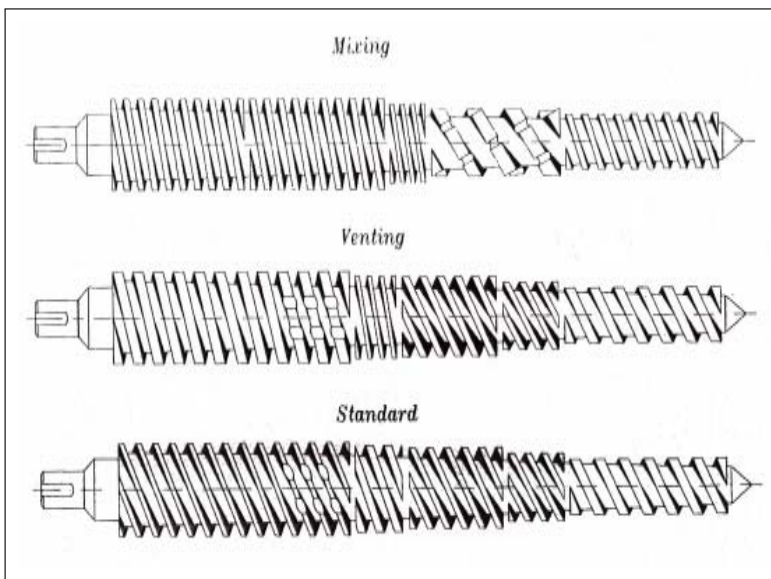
Conical counter rotating twin screw extruder, screw types (CTW): intensive mixing (i), venting (v), standard screws (s) for PVC dry blend.
